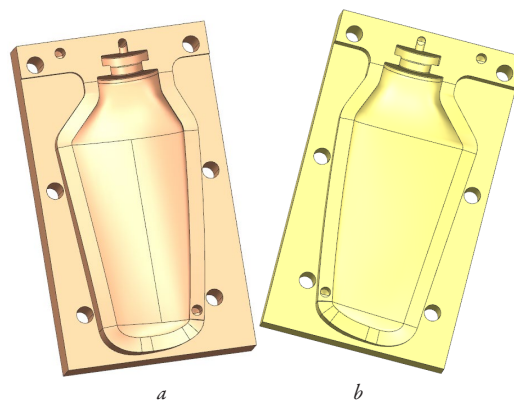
Components of the mold: *a* – half-mold 1; *b* – half-mold 2
